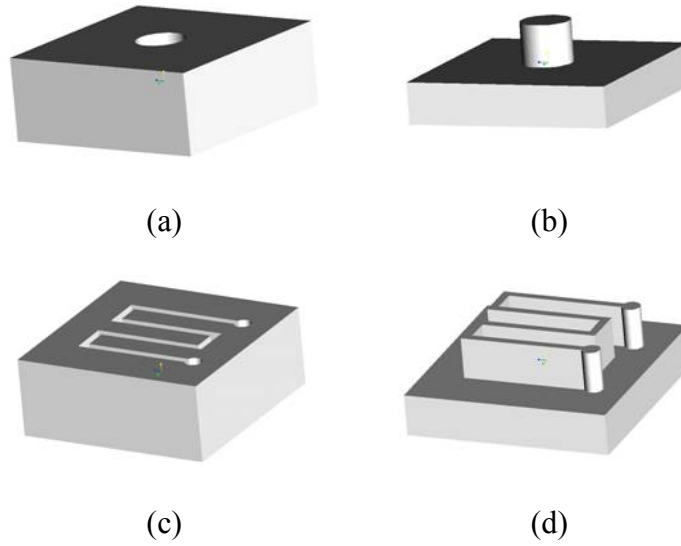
Male and female molds (a) Female mold (reservoir)
